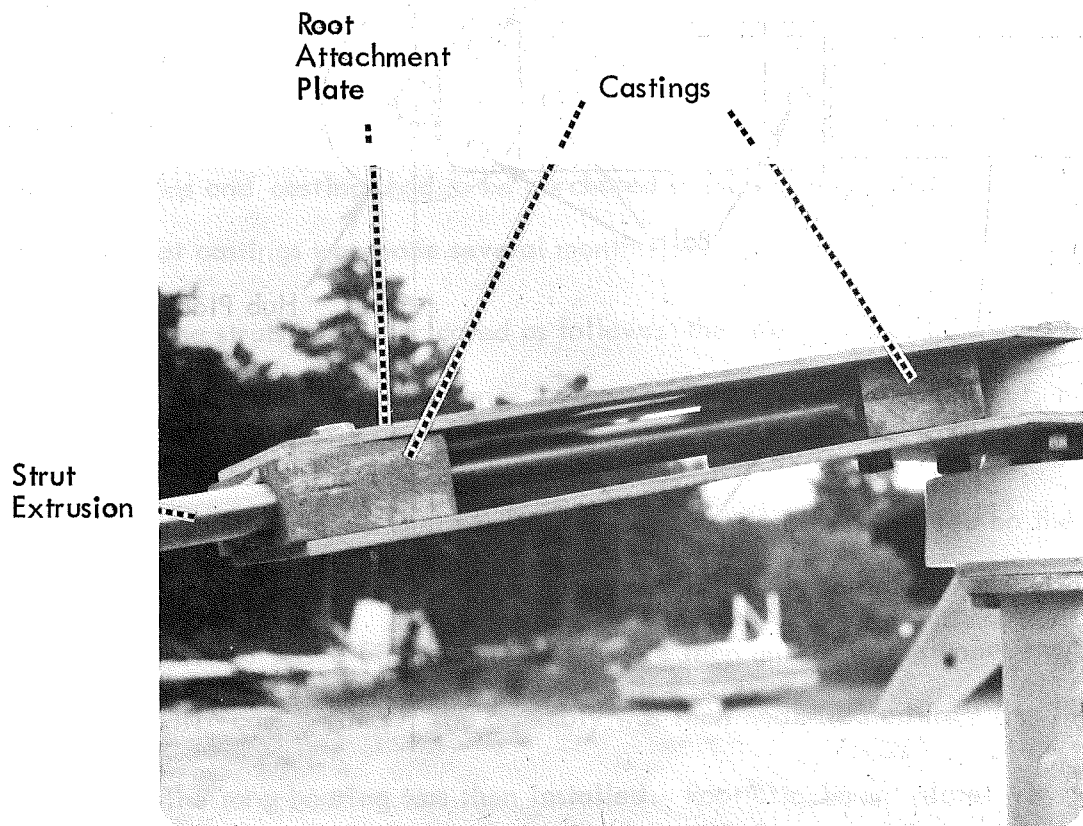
Strut Root Section Showing Airfoil with Castings Between Root Attachment Plates.
